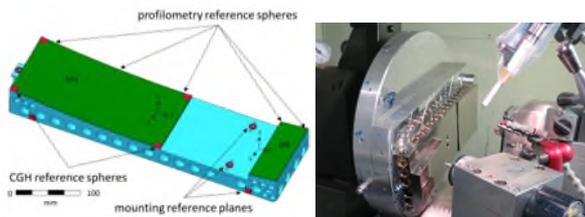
Left: freeform mirror module with reference structures; right: diamond milling process on a ultra-precision lathe
